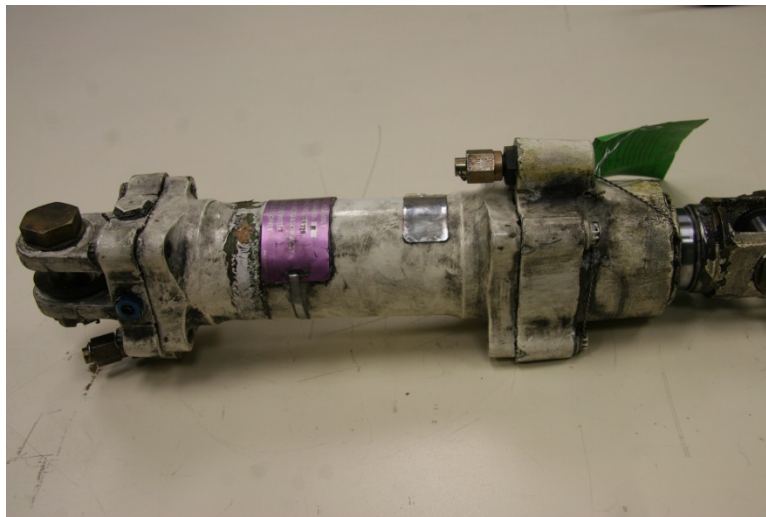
Nose Gear Retract Actuator, as Received at Boeing EQA Laboratory
